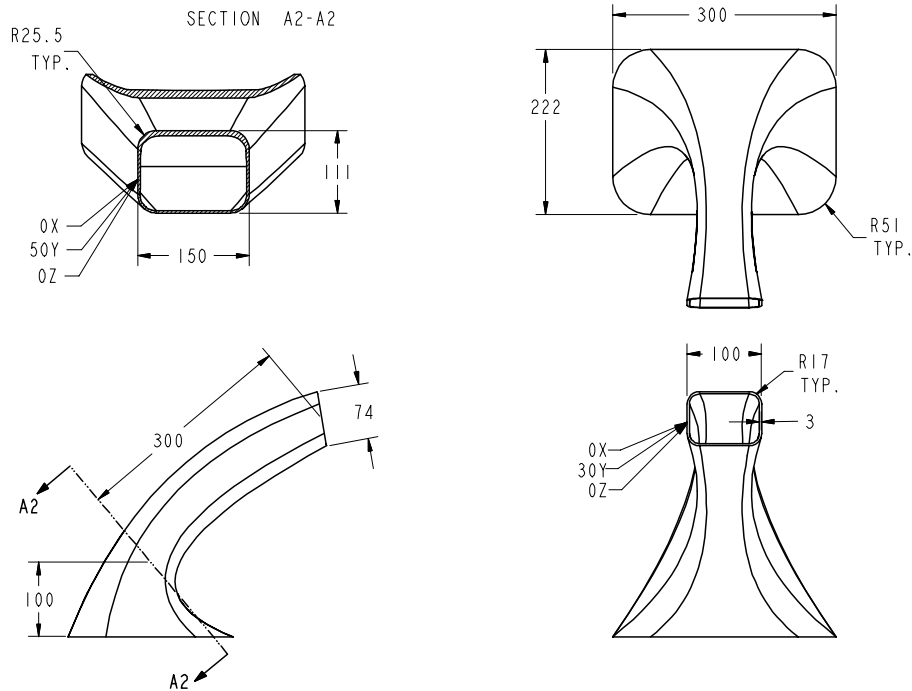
Sectioned view, left-side, front, and top views of the model
